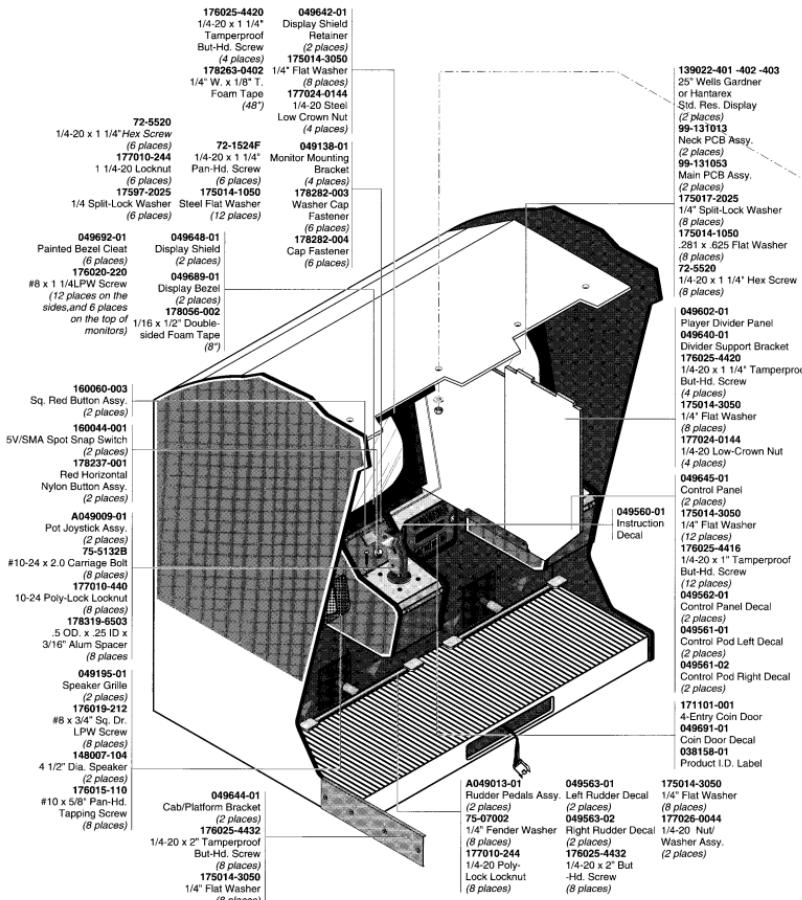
Cabinet-Mounted Assemblies, Front View
